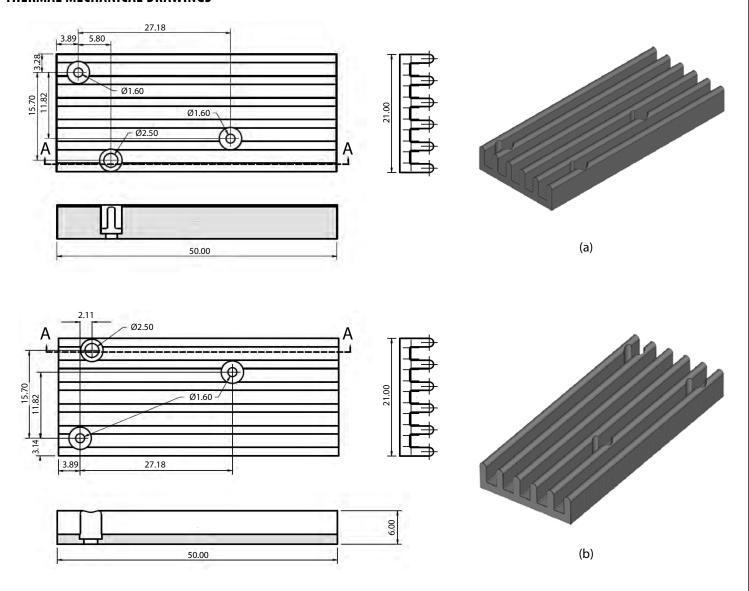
(a) Top side heatsink drawing, (b) Bottom side heatsink
